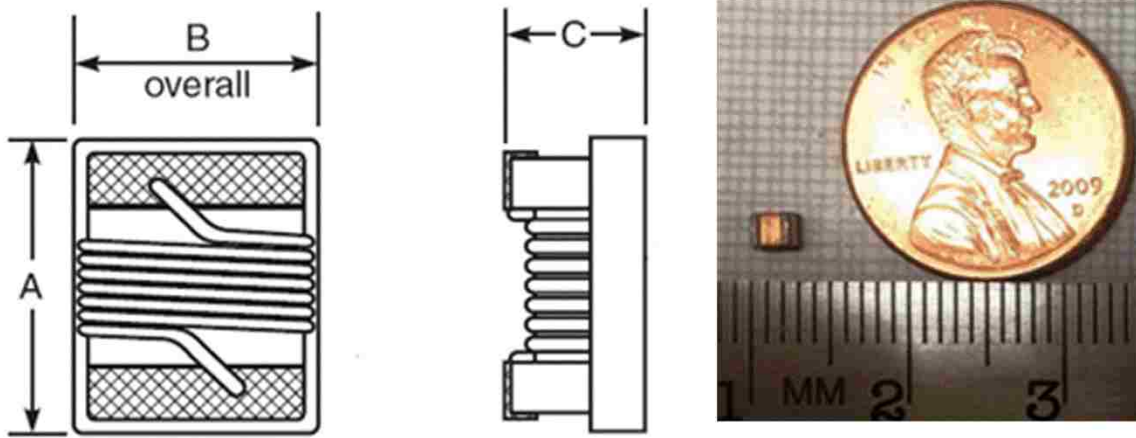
Chip inductor (1008CS-822XJLB) dimensions A: 2.92 mm, B: 2.79 mm, C: 2.03 mm, J = 5%, L= RoHS compliant silver-palladium-platinum-glass frit, B = In tape, but not machine ready.
